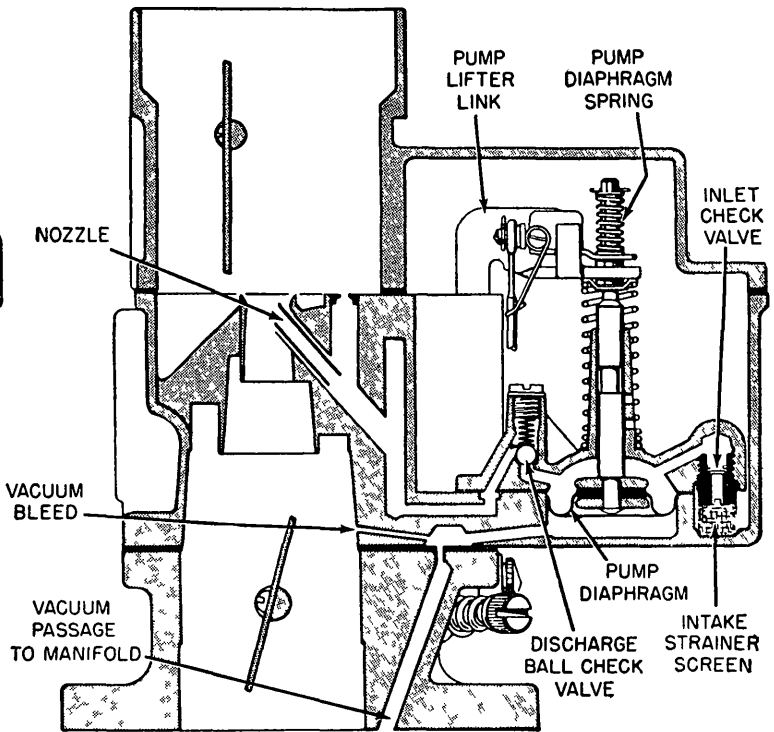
D Accelerating pump circuit of Carter YF carburetor used on Nash 1951 Statesman and Rambler
